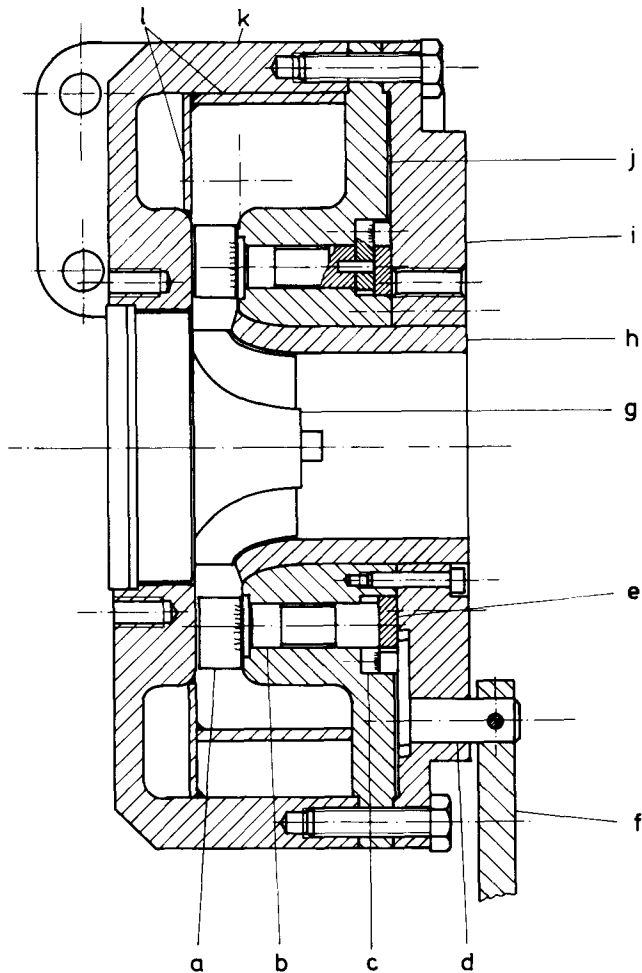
Cross sectional view of the turbine with adjustable guide vanes
